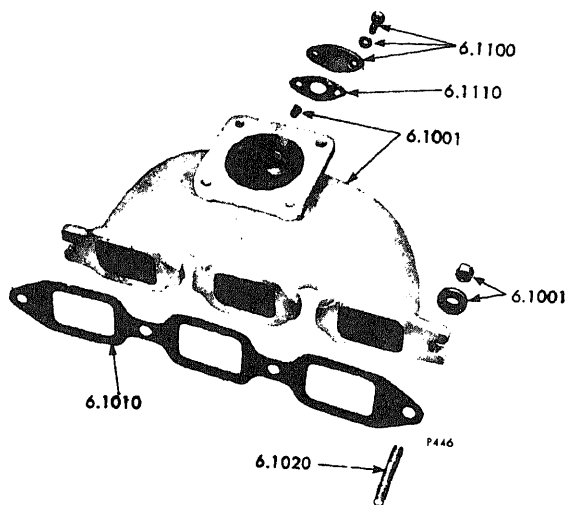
A EXHAUST MANIFOLD (Center Outlet)
